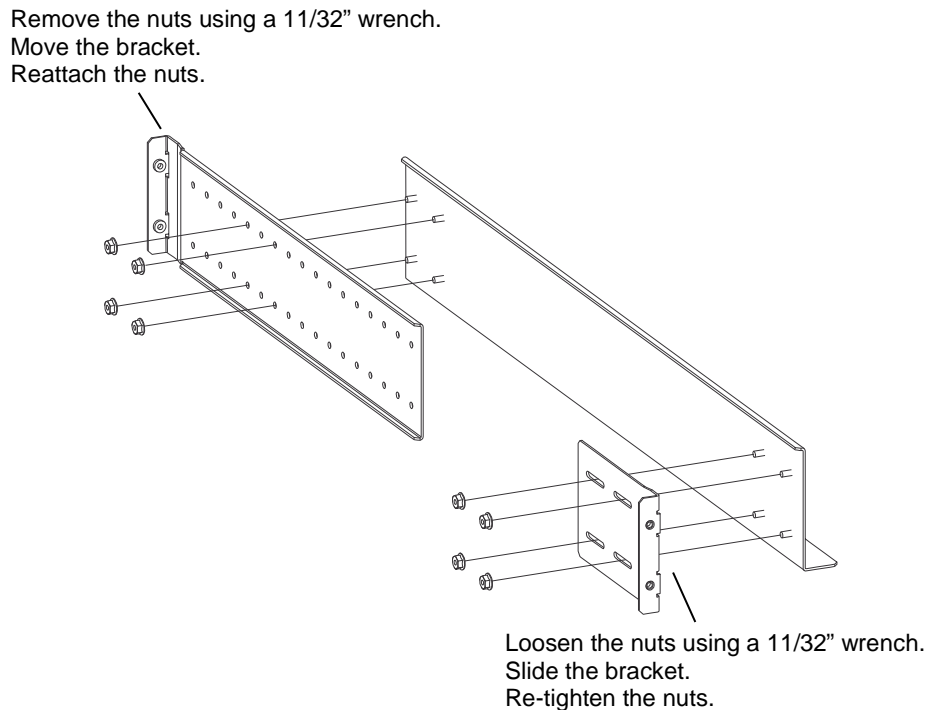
Adjusting the Location of the Rack Rail Assembly Brackets
